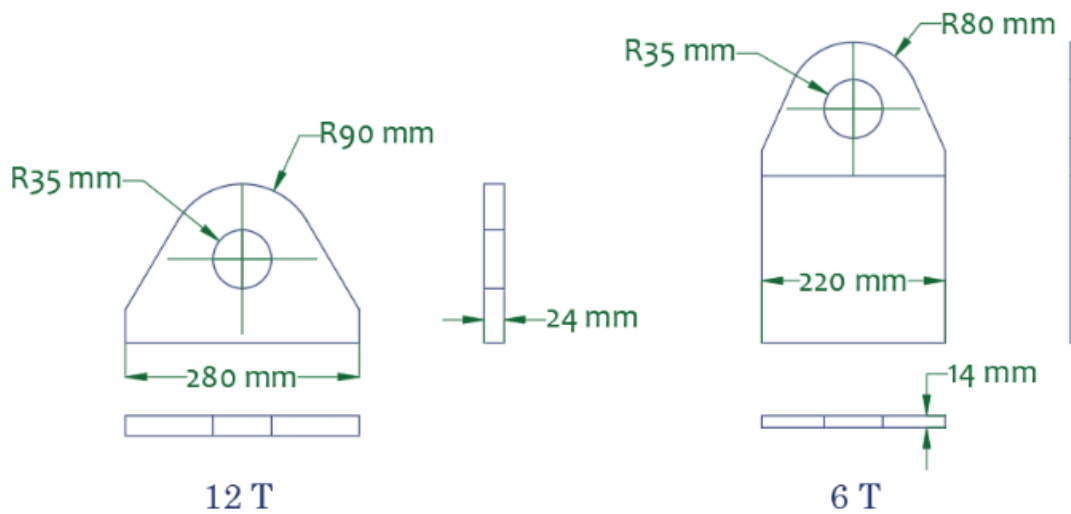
Lifting lugs according to the lifting plan (Lifting plan drawing).
